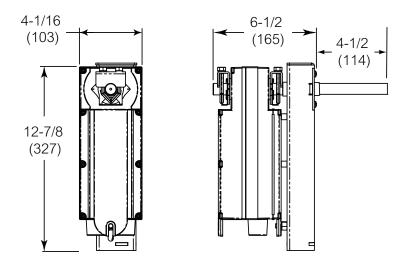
Mx40-717x-220 Actuator/Linkage Assembly
